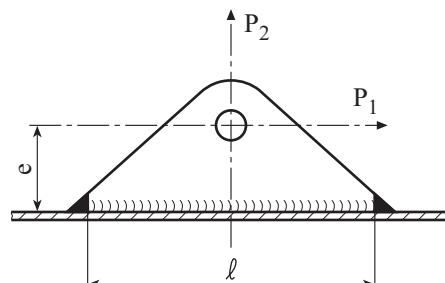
Weld joint of a vertically mounted lifting eye
